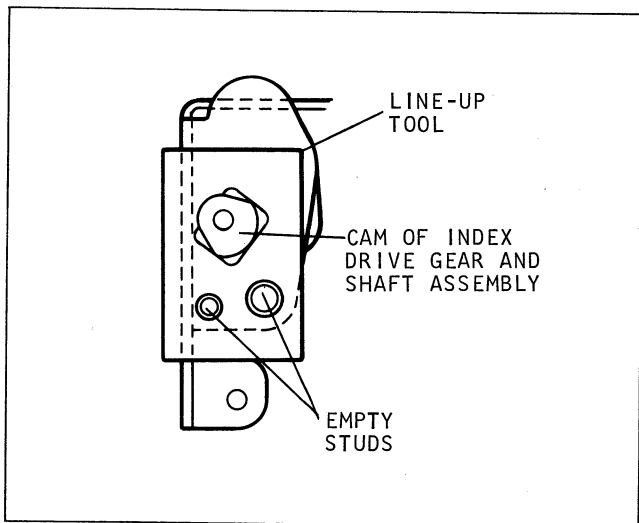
Figure C. Synchronizing Drive Gear Cam and Carrier Rod Cam
